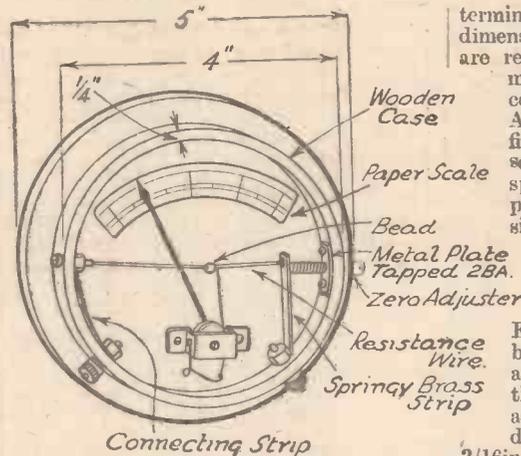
Sketch of the finished hot-wire meter described: dimensions are only approximate.
